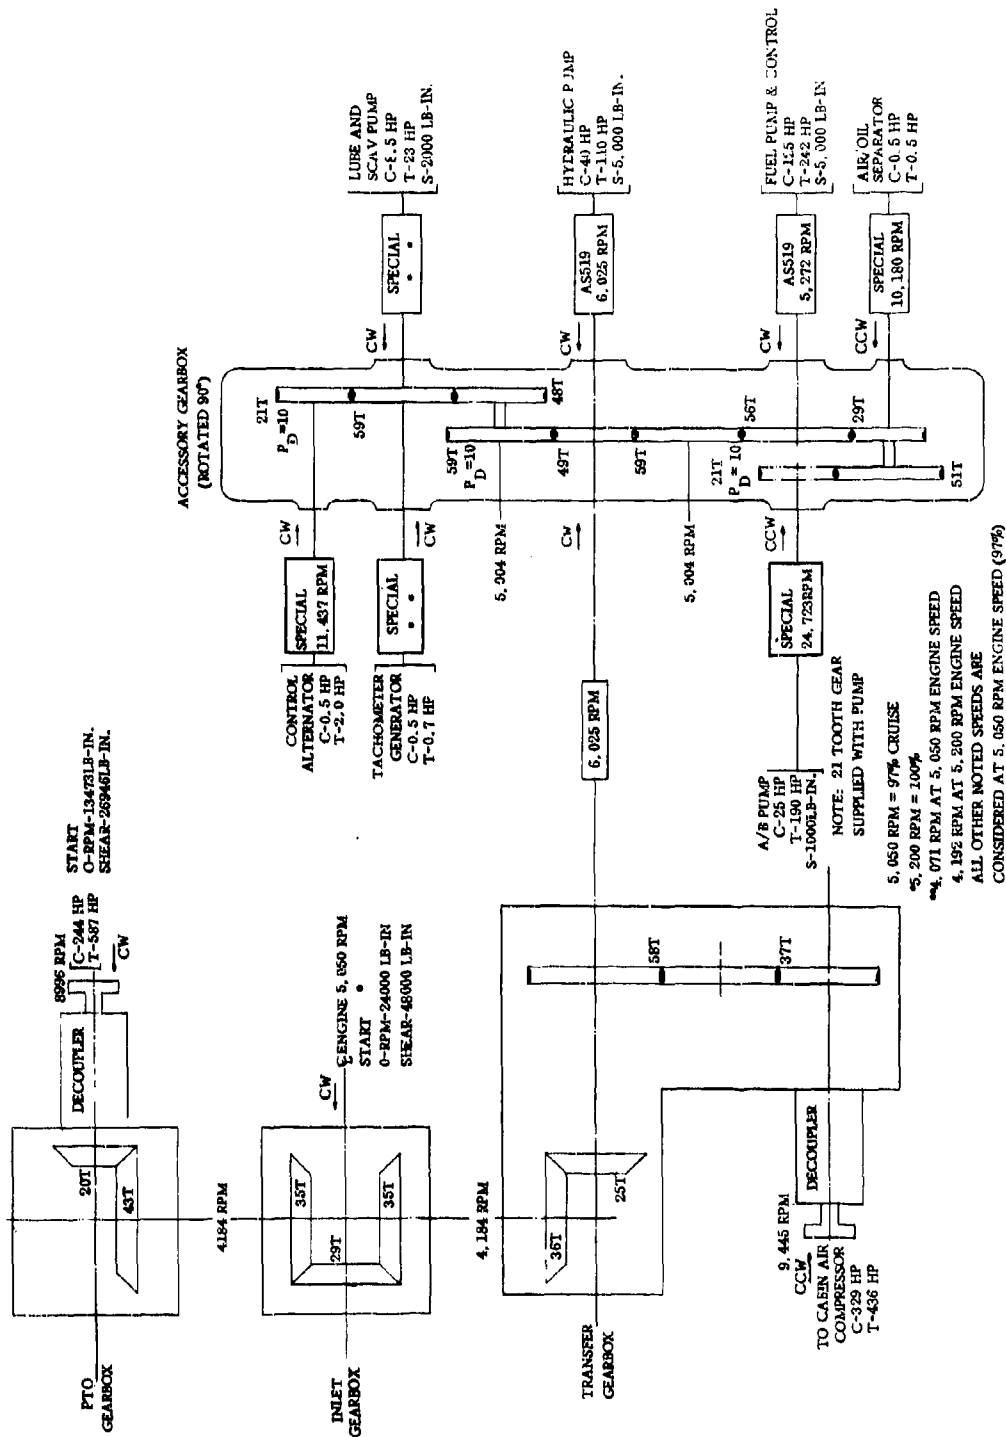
LOCKHEED ACCESSORY DRIVE SYSTEM
